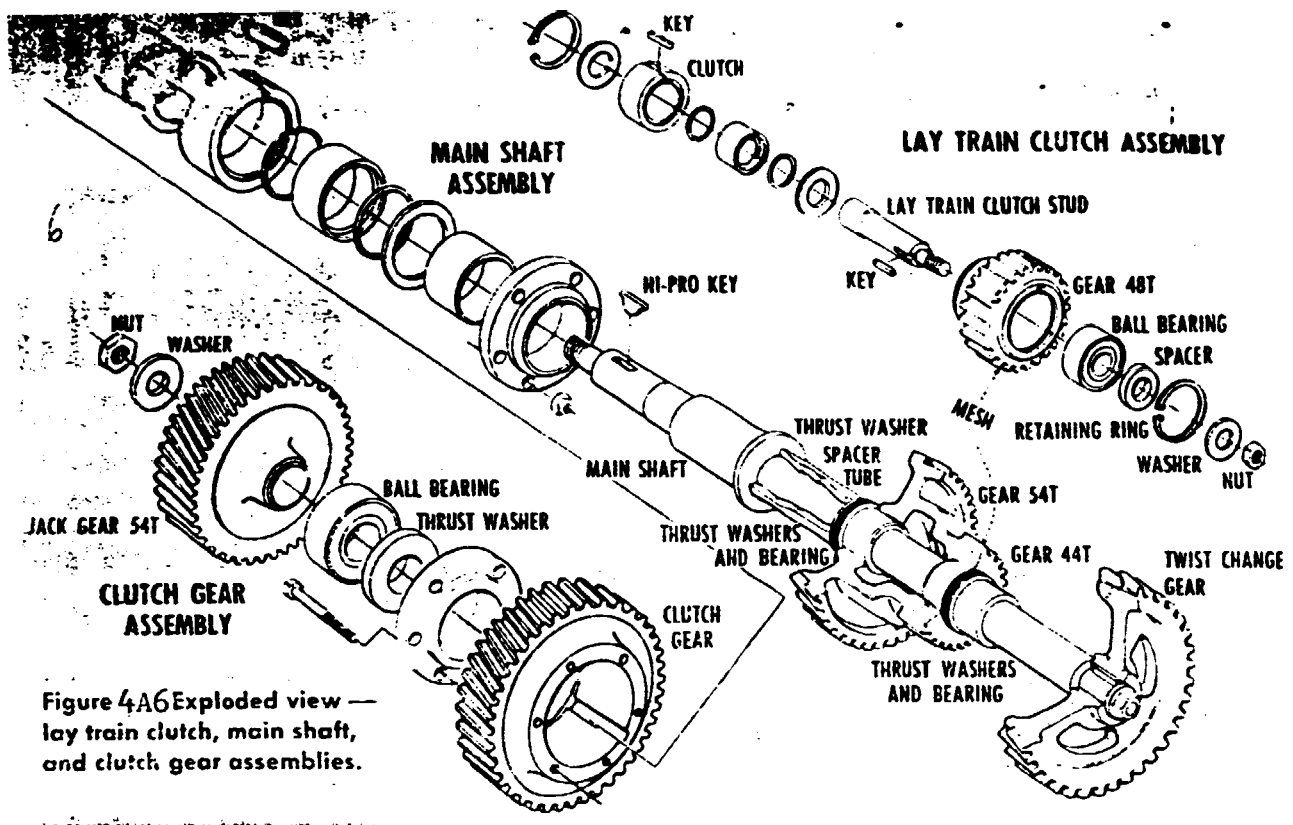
A6 Exploded view — lay train clutch, main shaft, and clutch gear assemblies.
